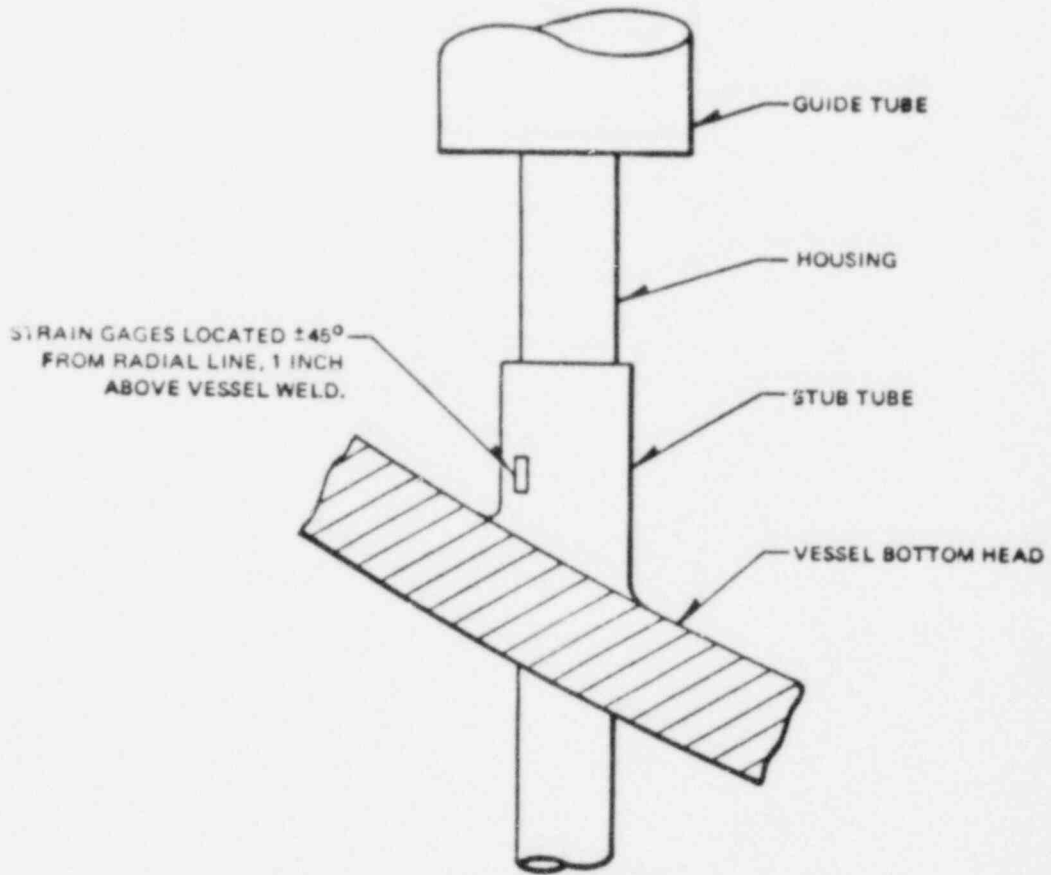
Strain Gage Locations on Control Rod Housing Stub Tube.
